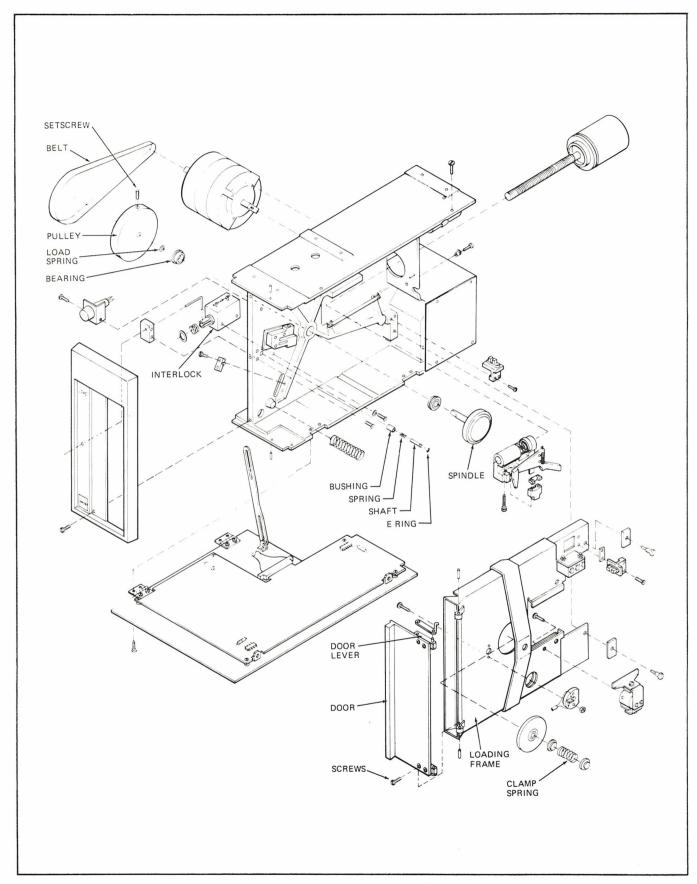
CLAMP—HUB and SPINDLE—ACCESS DOOR ASSEMBLY—INTERLOCK
